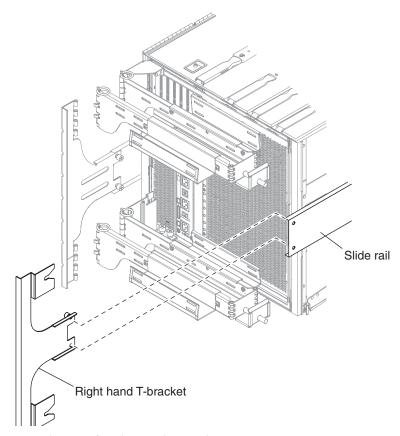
Attachment of Right-Hand T-Bracket
